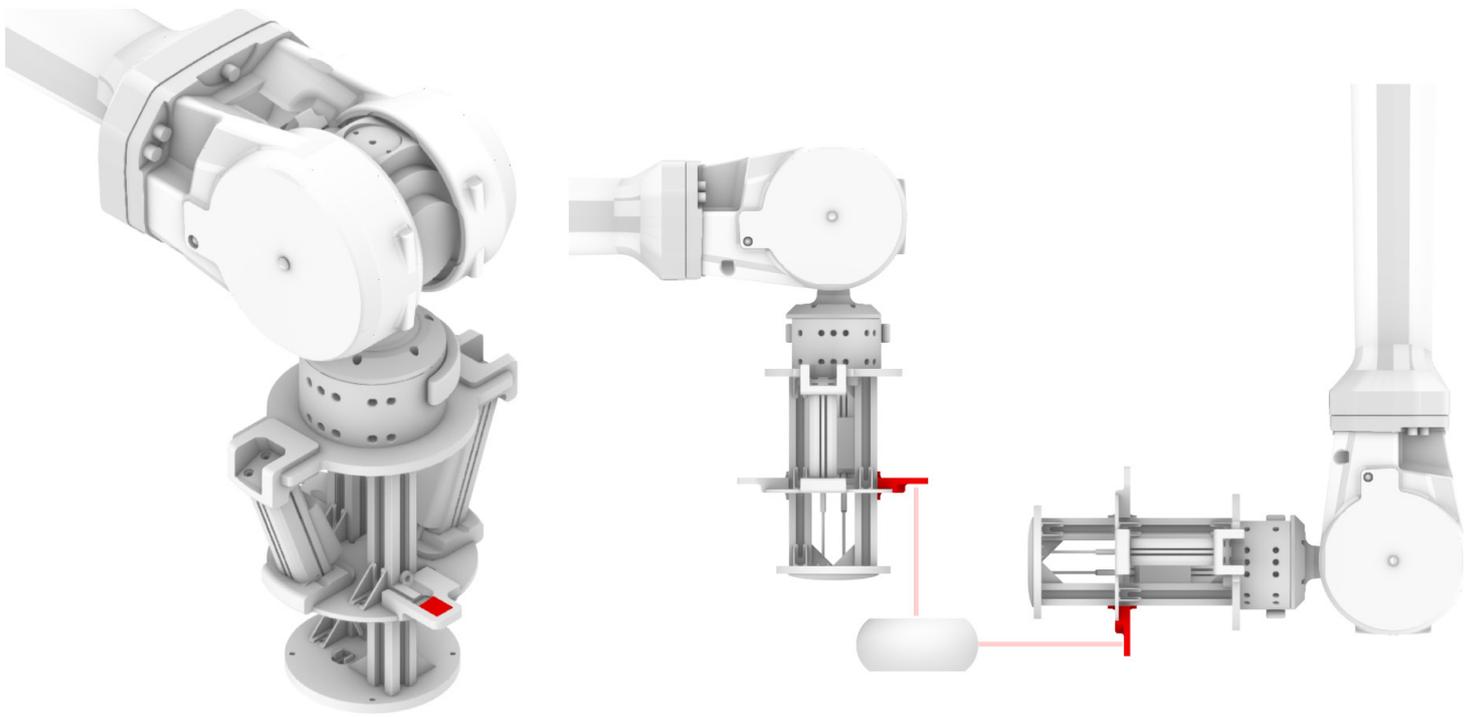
Distance sensor attached to pick and place tool using 3D-printed holder
